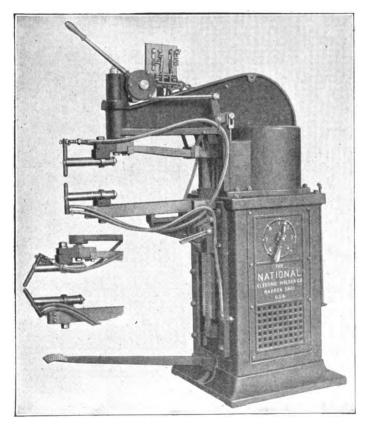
24-Inch Drop Arm Spot Welder Showing Different Positions of Universal Points Courtesy of National Electric Welder Company
